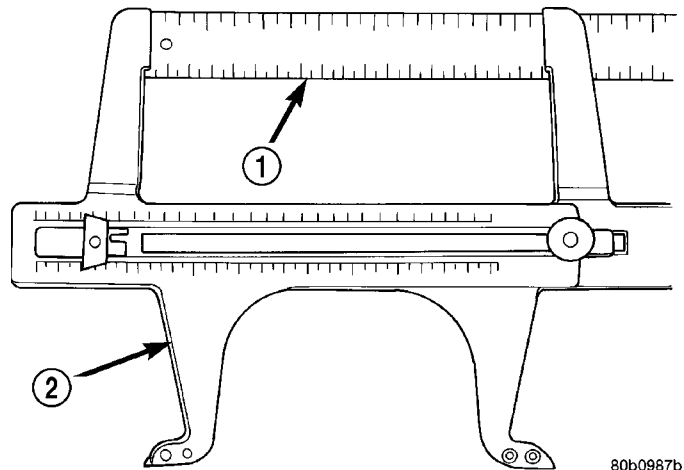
SETTING GAUGE TO PARK BRAKE SHOE MEASUREMENT
